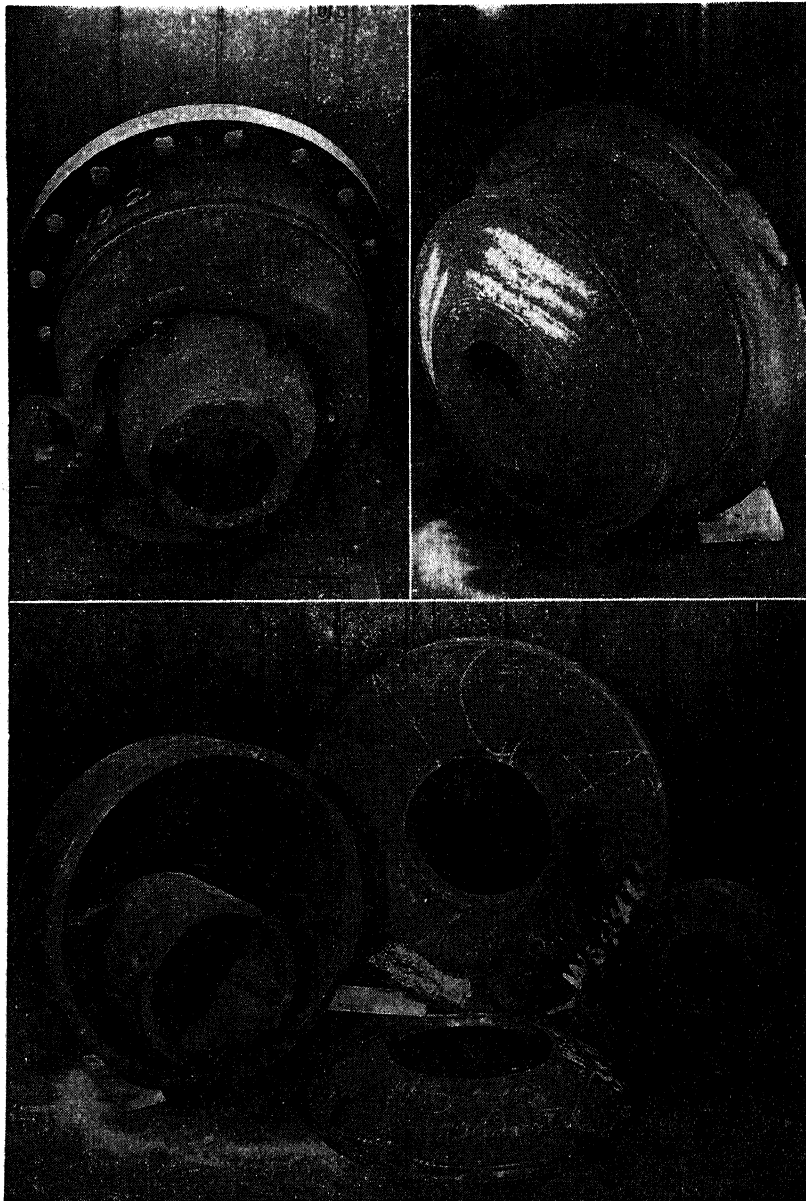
Frequent breakage of cast iron cylinder heads (left) due to lime deposits, are overcome by fabricating the heads from welded steel. Component parts are shown below. Finished head shown above at right. Welded throughout with shielded arc mild steel electrode. Material cost \$119.00. Labor, welding and machining \$83.00. Finished head weighs 975 lbs.
